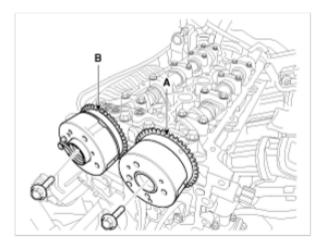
Identifying Intake And Exhaust CVVT Assembly Courtesy of HYUNDAI MOTOR AMERICA
